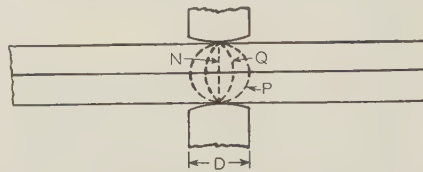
Diagram illustrating welding of high resistance material
